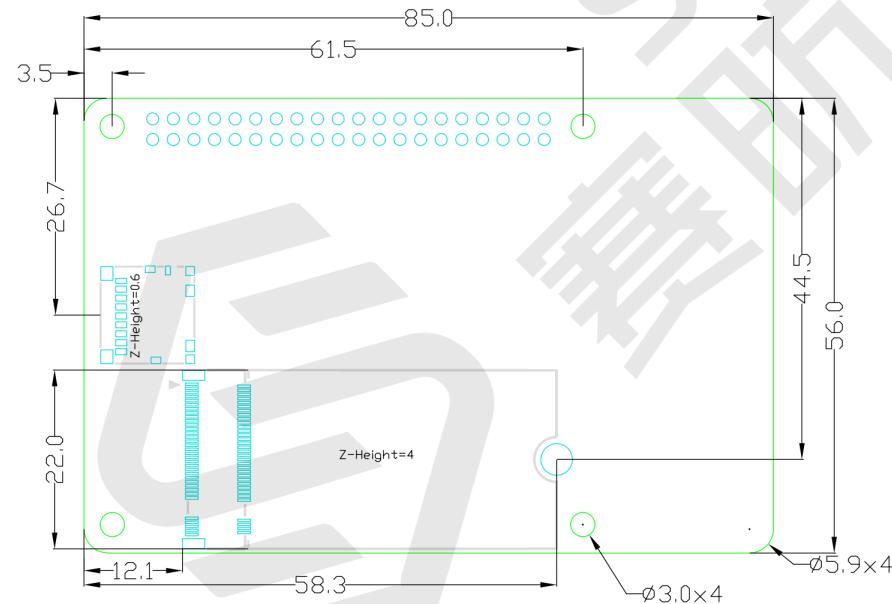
VisionFive 2 Lite Mechanical Drawing - Bottom View
